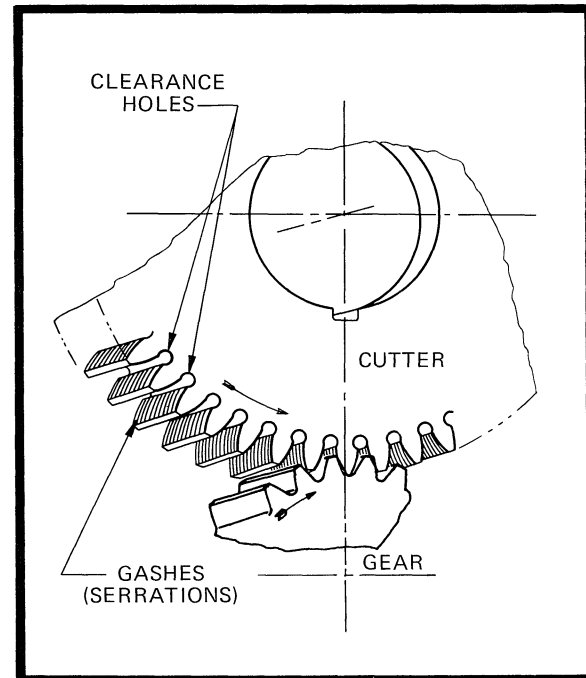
Work gear in crossed-axes mesh with rotary shaving cutter mounted above it.
